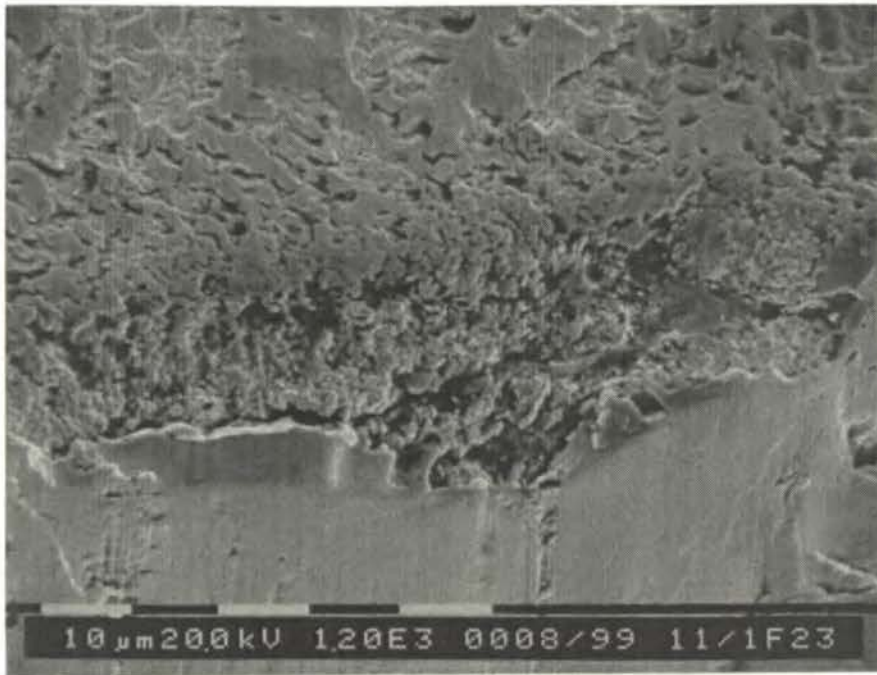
37 Magnified view of a KC730 tool showing crack at a chipped area of the cutting edge and workpiece galling on the flank, after cutting Inconel 718 for 23 minutes at 25 m/min and 0.08 mm/tooth
